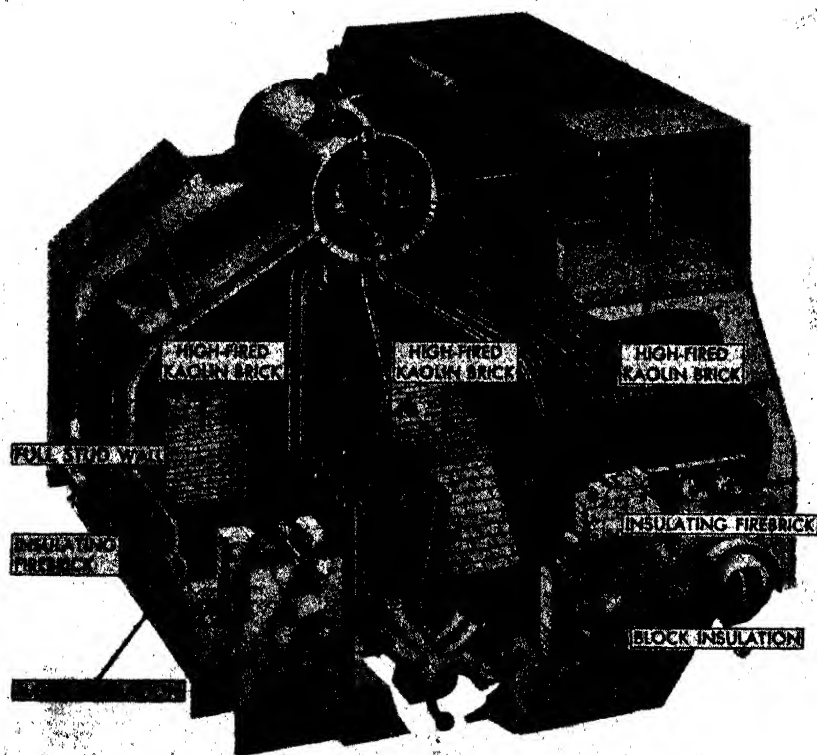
Babcock and Wilcox single uptake controller super-heat boiler.
